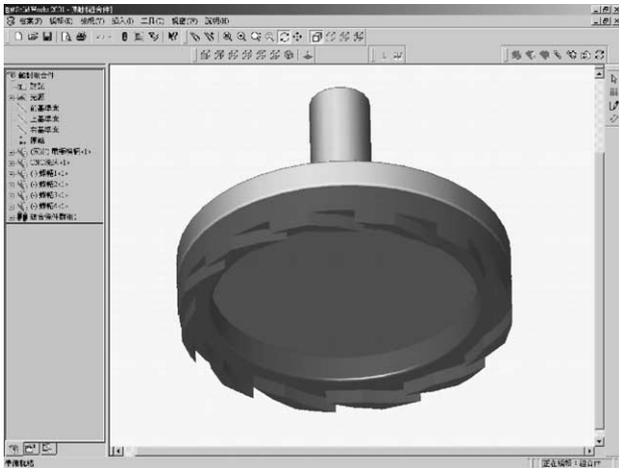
CAD model of EDM electrode for gas seal ring face.
